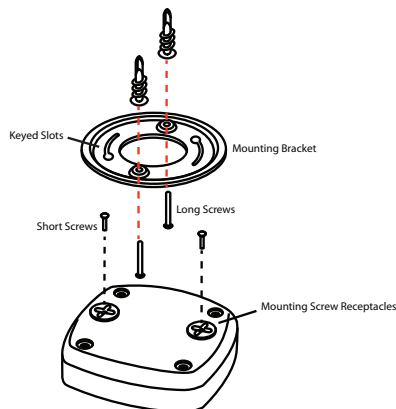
LoRaWAN Gateway Ceiling or Wall Mount
